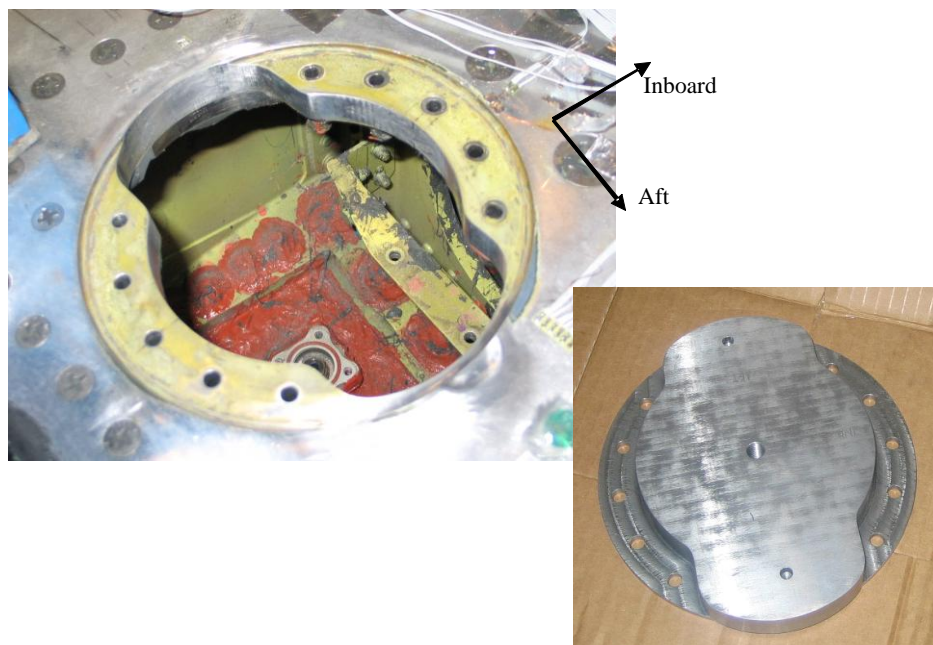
Fuel Pilot Valve Cut Out Rework Showing Matching Steel Plug
